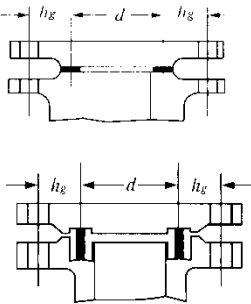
Examples of Welded Joints Approved for Each Case (continued)
